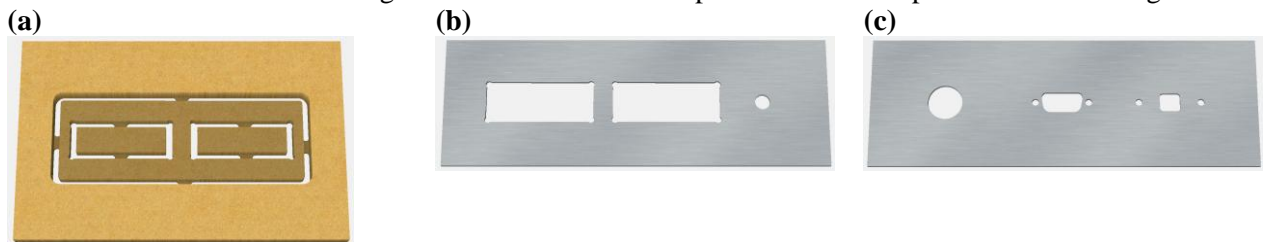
Renderings of the CNC-milled parts including (a) the PVC foam spacer for the displays, (b) the aluminum front and (c) back panels.
